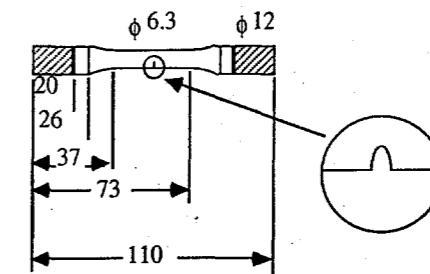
Tensile specimen dimensions (all lengths are in mm). Notch in specimen that underwent LCF deformation is produced by a 2mm diameter mill and is 2mm deep.
